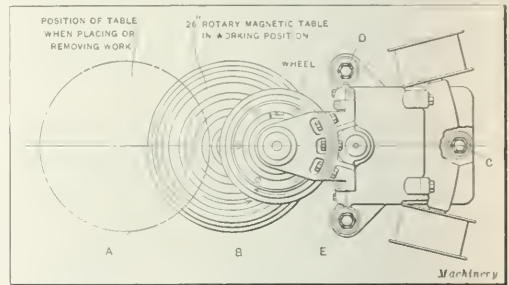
Diagram showing Working Position of Table on Blanchard Machine and Method of adjusting Vertical Column
